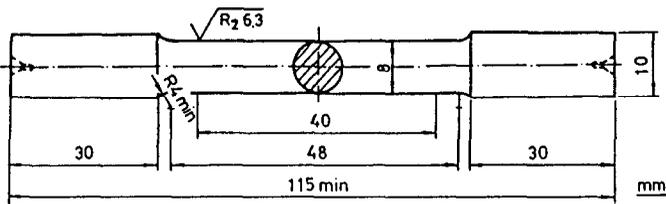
Joint tensile specimen (DIN 50125-A8×40).
